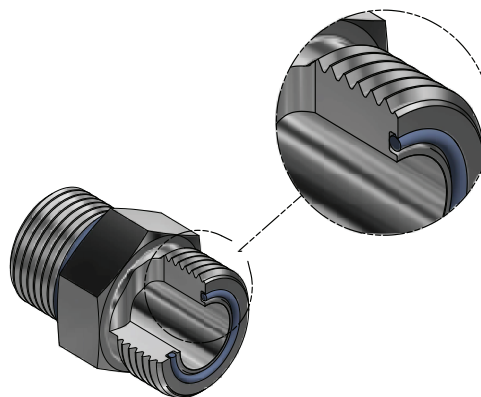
Captive O-ring Groove (CORG) Cutaway
